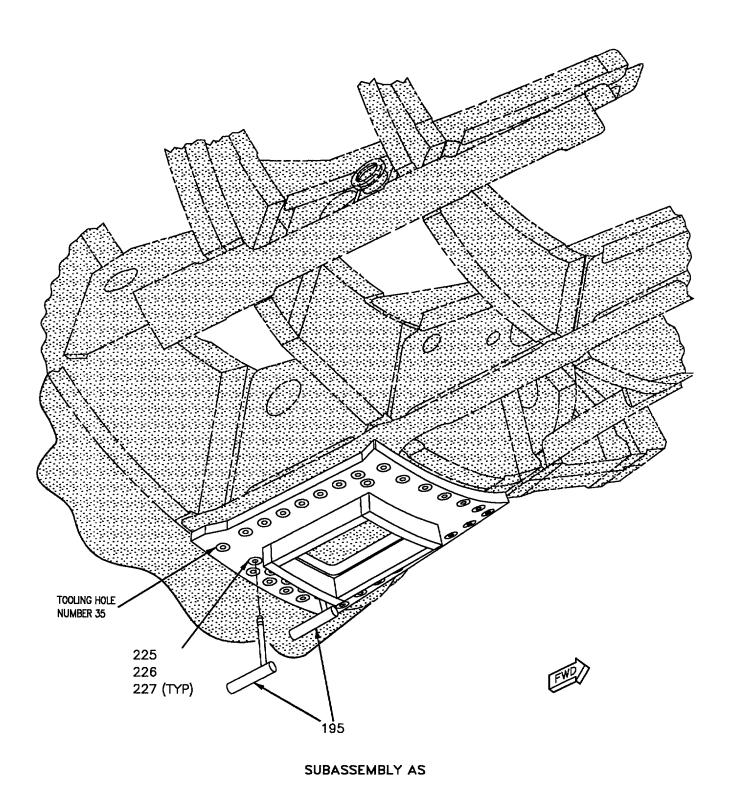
Locating and Drilling Attach Hole Pattern in Lower Inlet Sub-structure for Access Cover 74A322680, Between Y442.000 and 453.000, After Inlet is Installed
